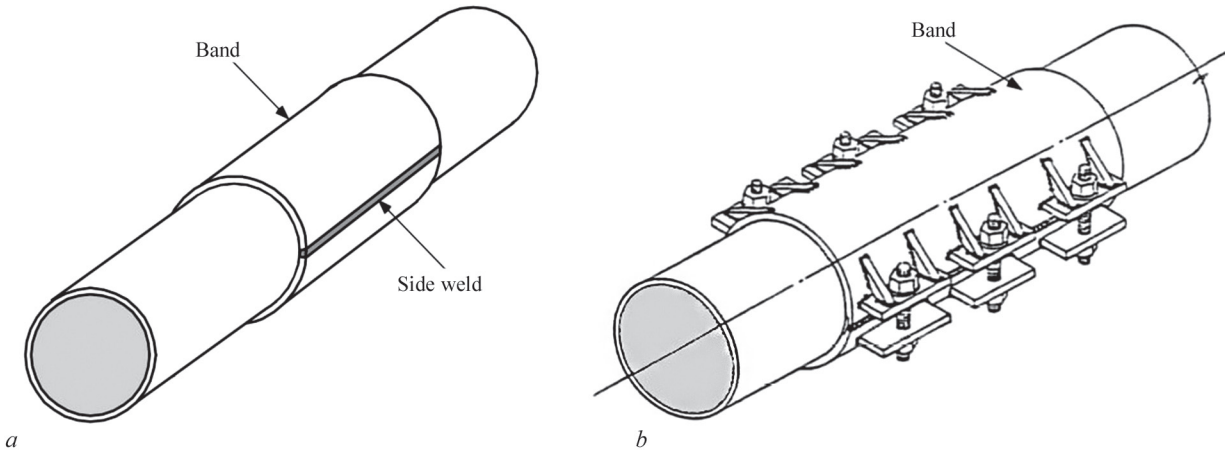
Types of bands according to the method of mounting: *a* — welded; *b* — on bolted joints
